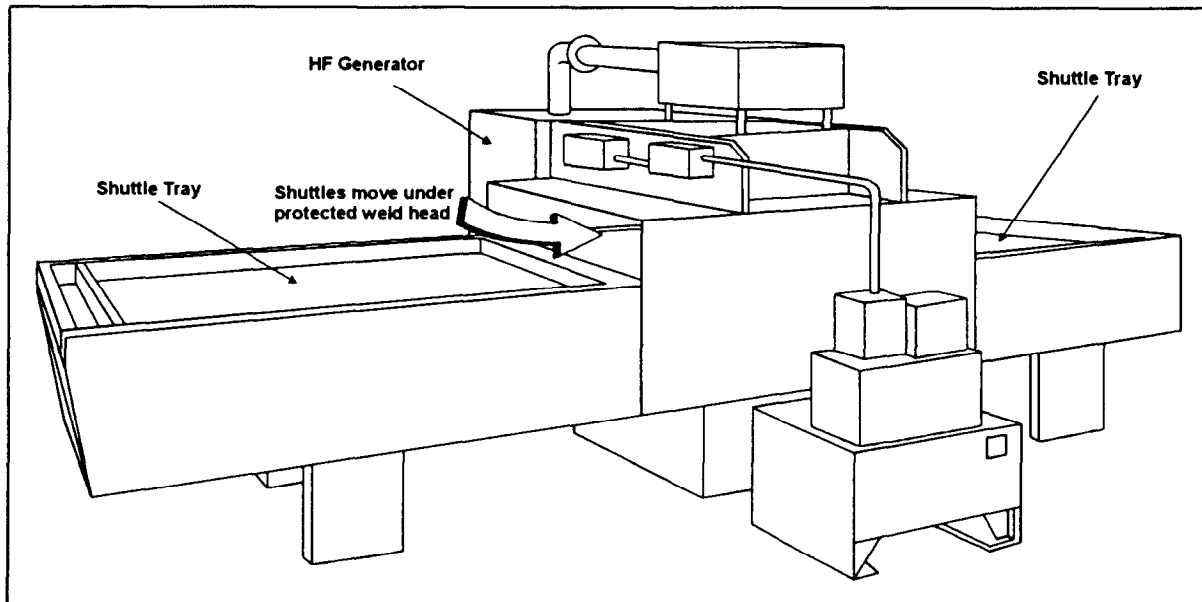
Side-to-Side Shuttle Welding Machine
